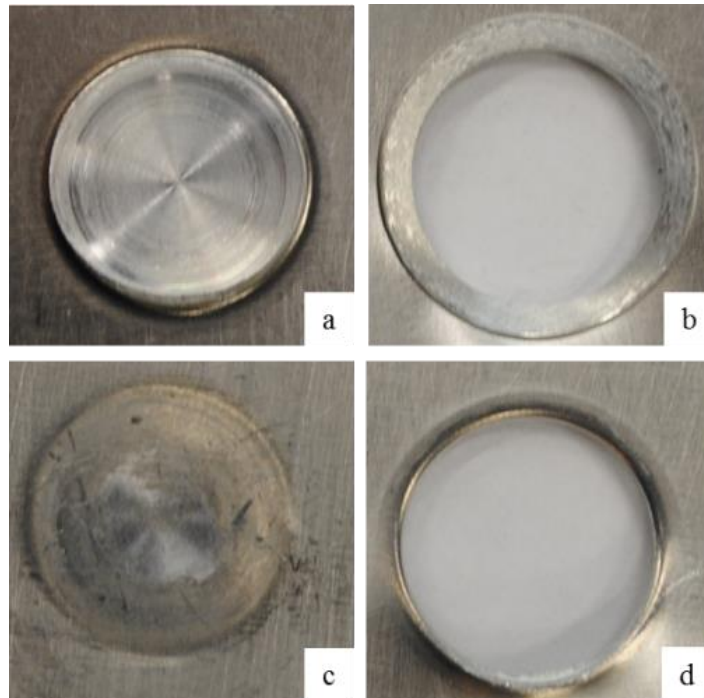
A shear specimen exhibiting the weld pullout mode. a) The top of the bottom plate. The weld nugget remains in the bottom plate. b) The top of the top plate. c) The bottom of the bottom plate. d) The bottom of the top plate.
